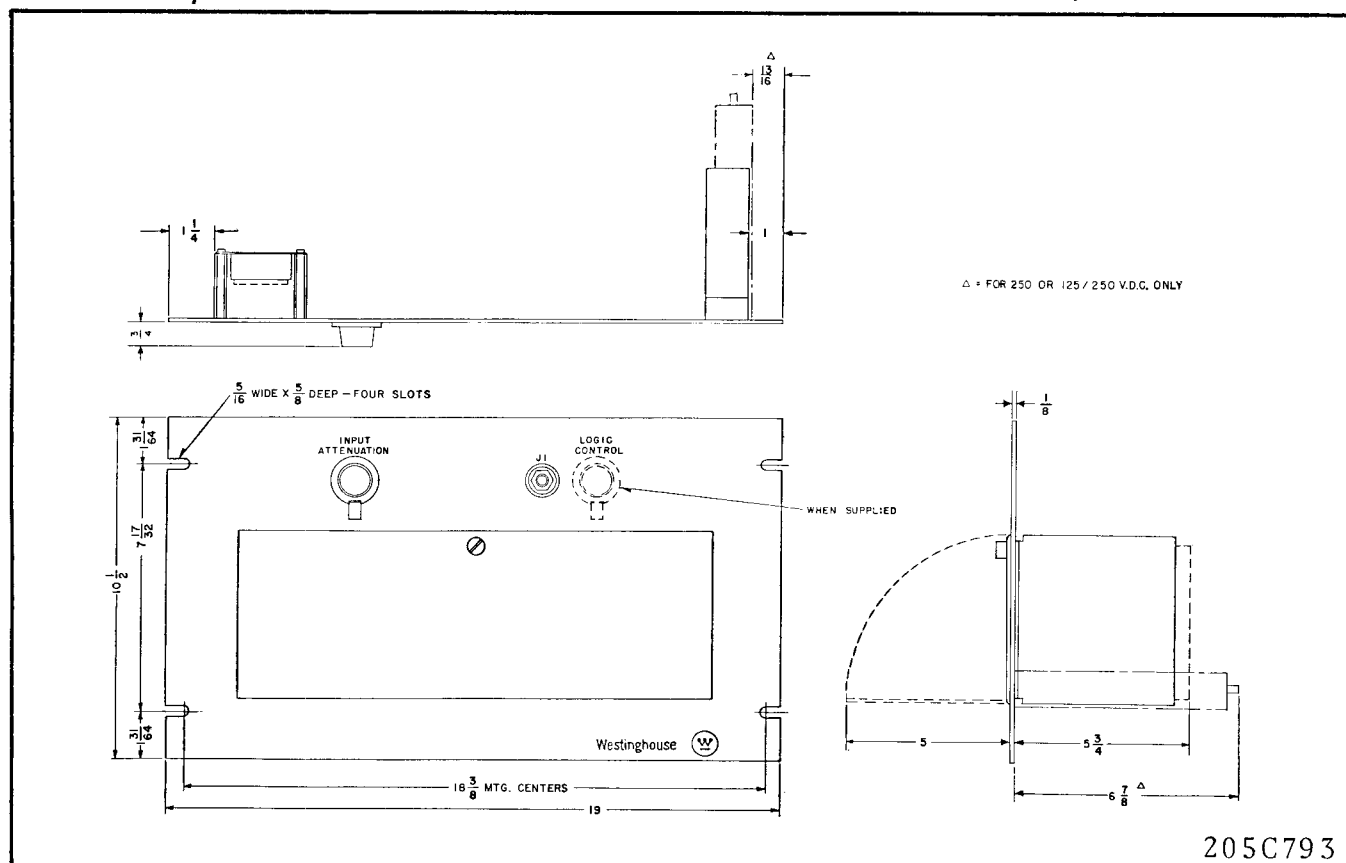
Outline and drilling plan for the type TCF receiver assembly.
